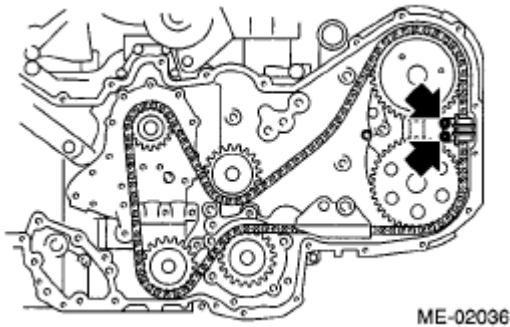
Identifying Idler Sprocket (Upper)
